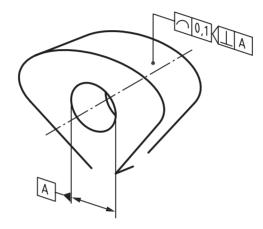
Specification using an intersection plane perpendicular to the datum
